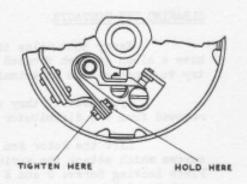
TO AVOID TWISTING BREAKER ARM SPRINGS WHEN TIGHTEN-ING NUTS.
